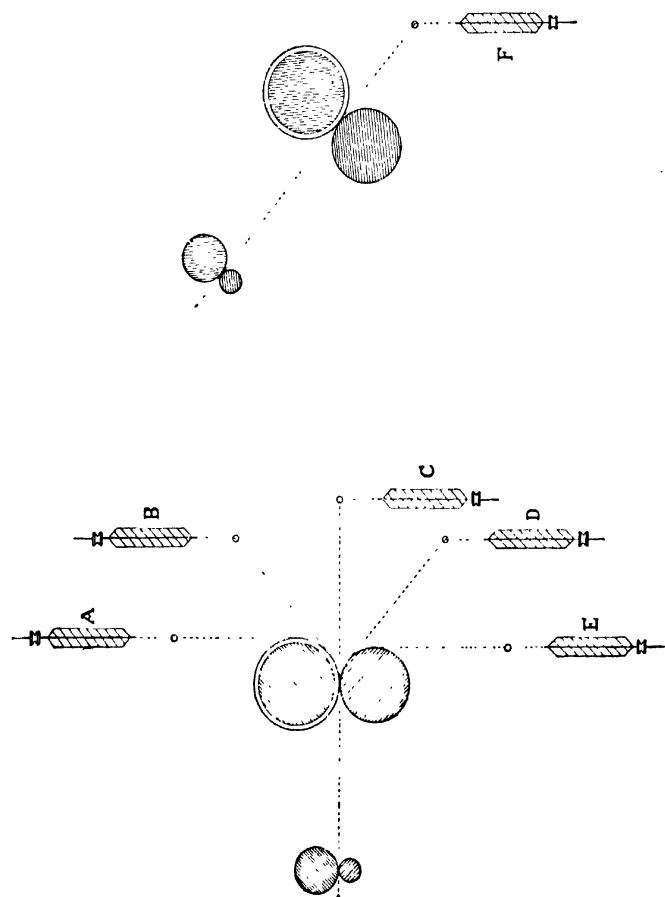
A.—Possible position of Spindle with Guide Eyes in relationship to Drafting machines
